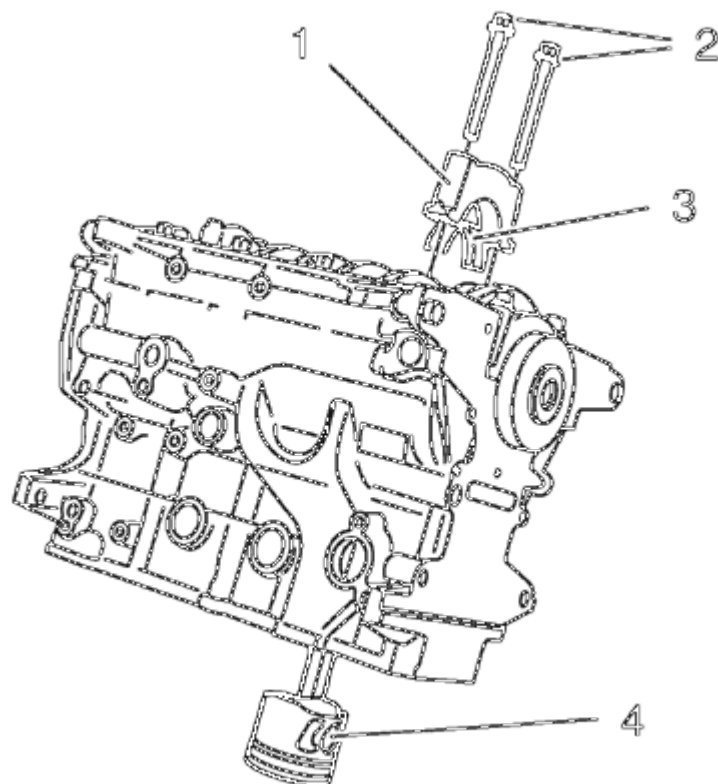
Connecting Rod Assembly, Connecting Rod Bearing And Connecting Rod Cap
